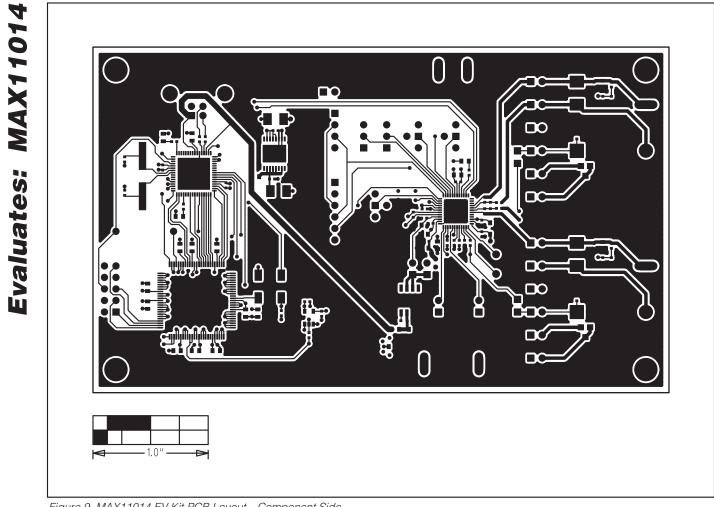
MAX11014 EV Kit PCB Layout—Component Side
